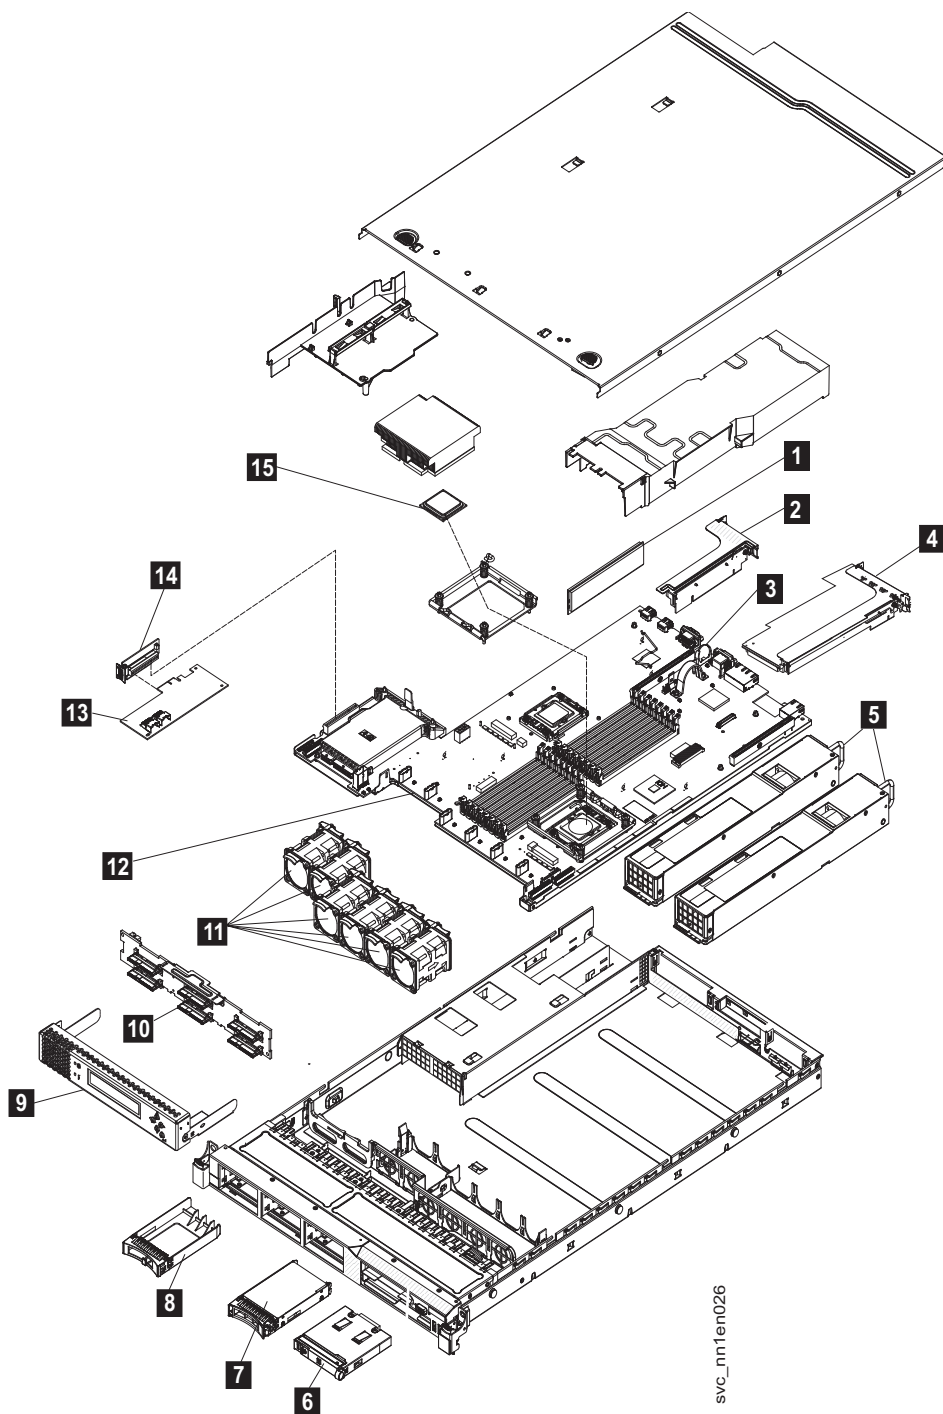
Exploded view of the SAN Volume Controller 2145-CF8 node
